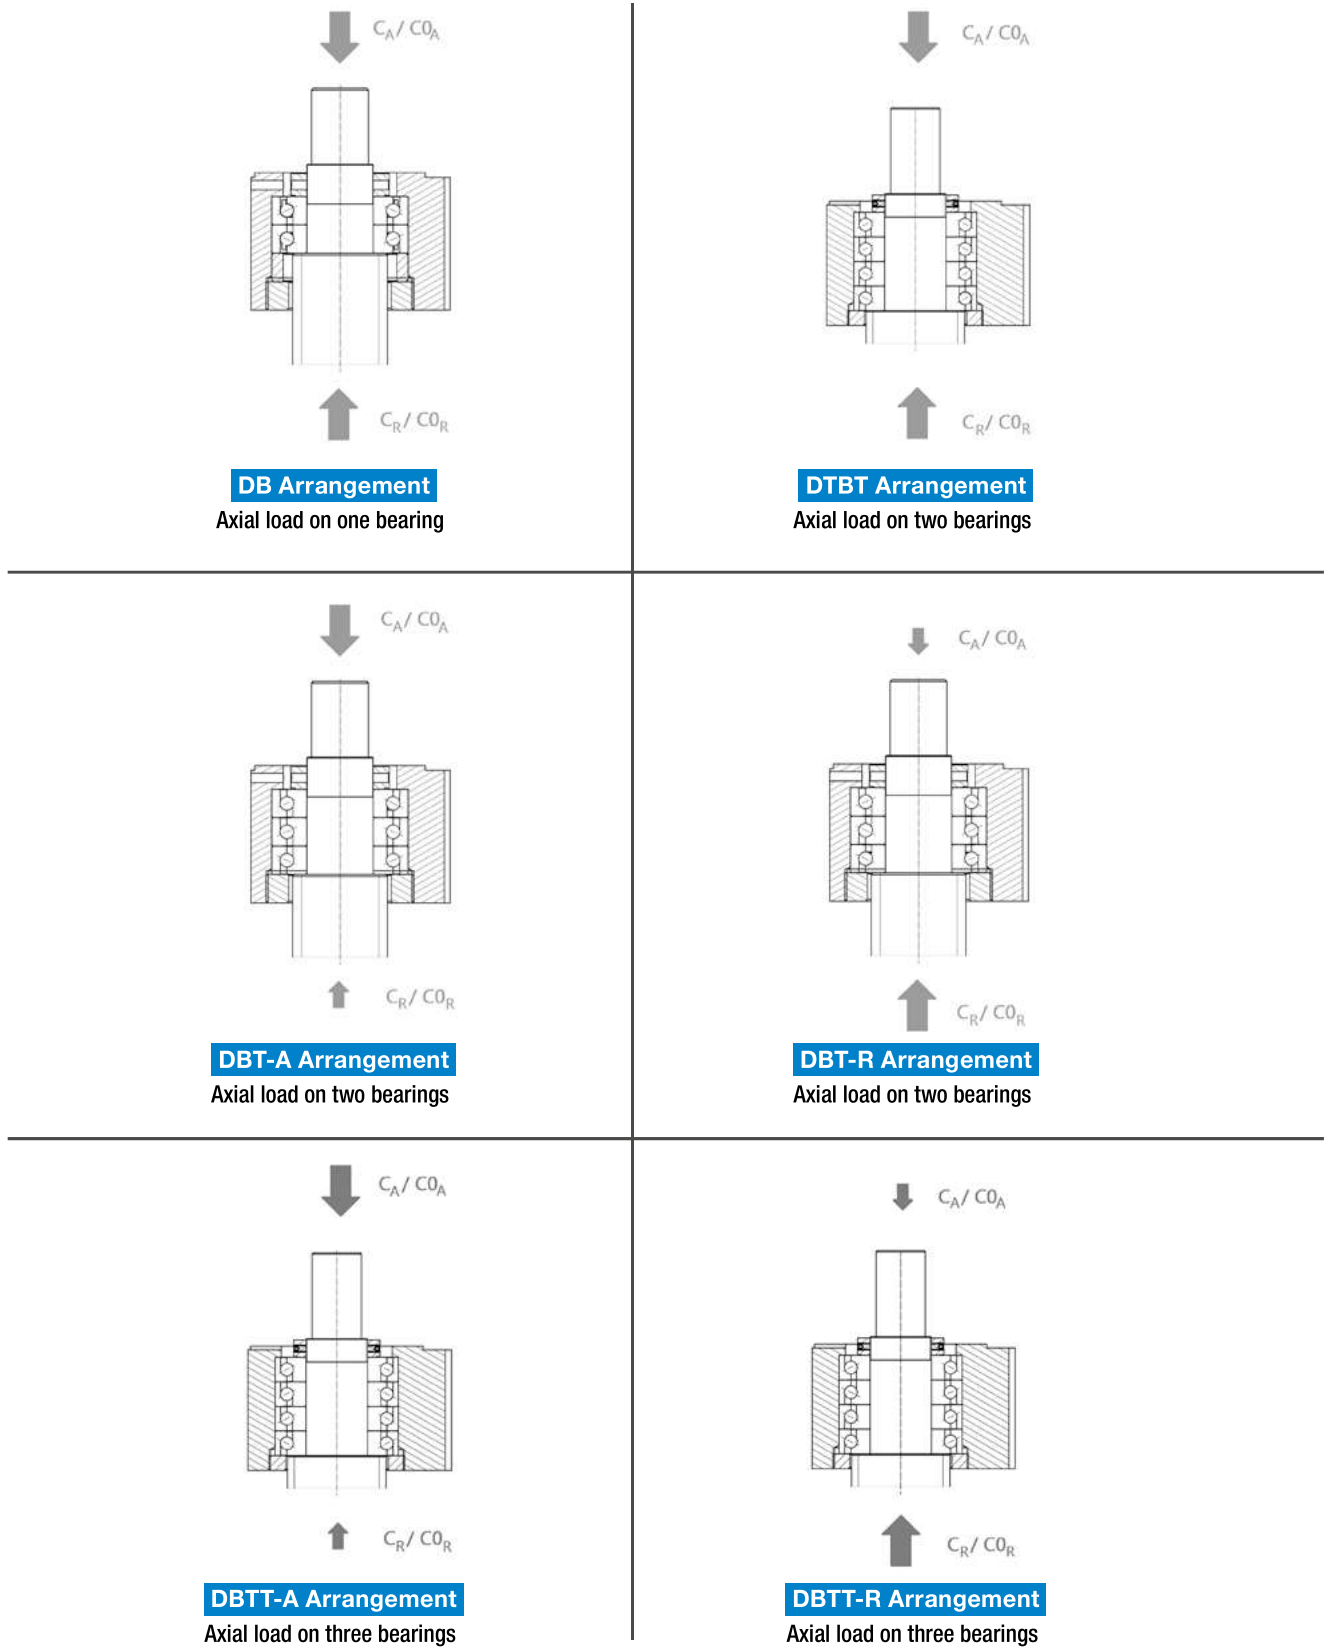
Bearing arrangement in fixed bearing units BSTK
